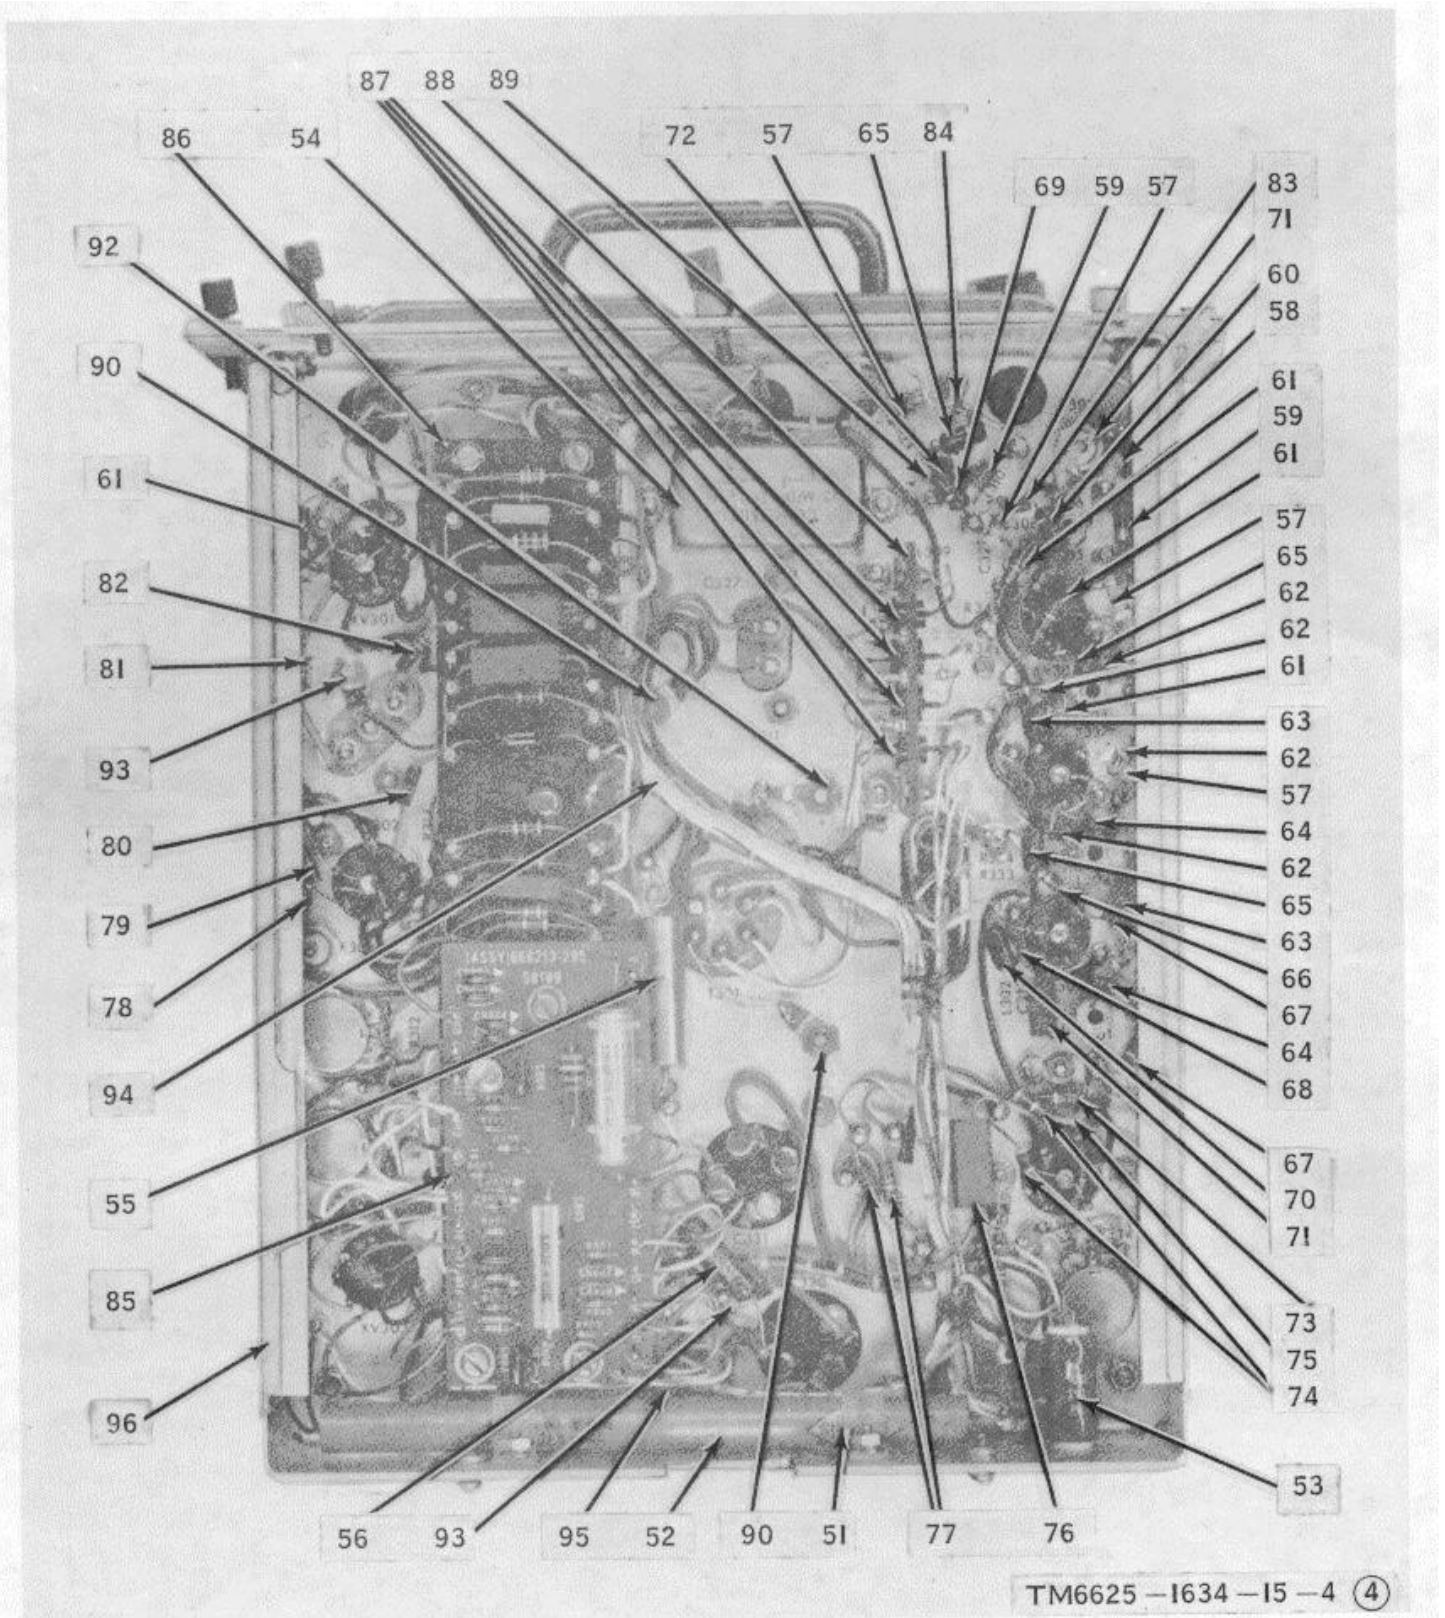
(4). Electrical equipment chassis (sheet 4 of 4).
